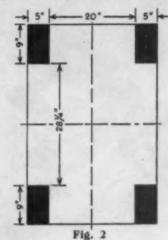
shows the massive construction of the beam frame used in building the 22-ounce Lester machine, which is made of solid molybdenum steel castings. Fig. 2 is a cross-sectional sketch of this same frame. It will be noted that the four members of the frame, each measuring 5" by 9", have a total cross-sectional area of 180 square inches. In order to attain equal cross-sectional area and comparable strength in a tie bar constructed frame, the bars would have to be more than $7^{1/2}$ in diameter, a somewhat impractical size.
